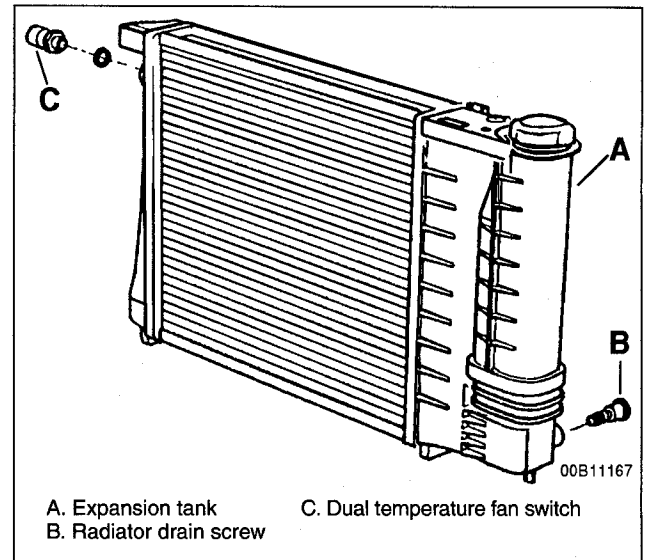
Radiator assembly with integral expansion tank (4-cylinder engine).
